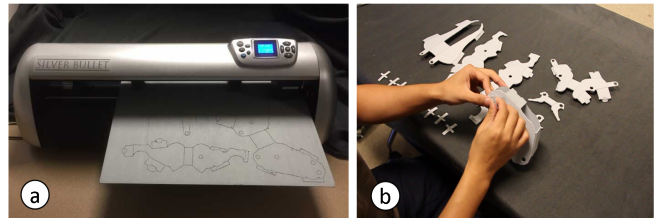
shows (a) 24" Silver Bullet Die cutter, and (b) the 2D T-Rex patterns when folding and assembling
